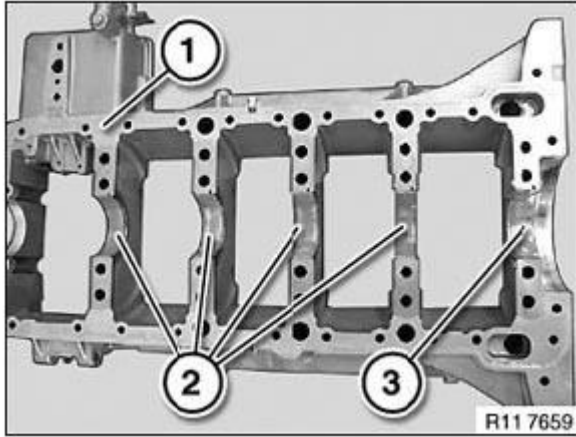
Identifying Crankcase Lower Half Guide Lugs Position
